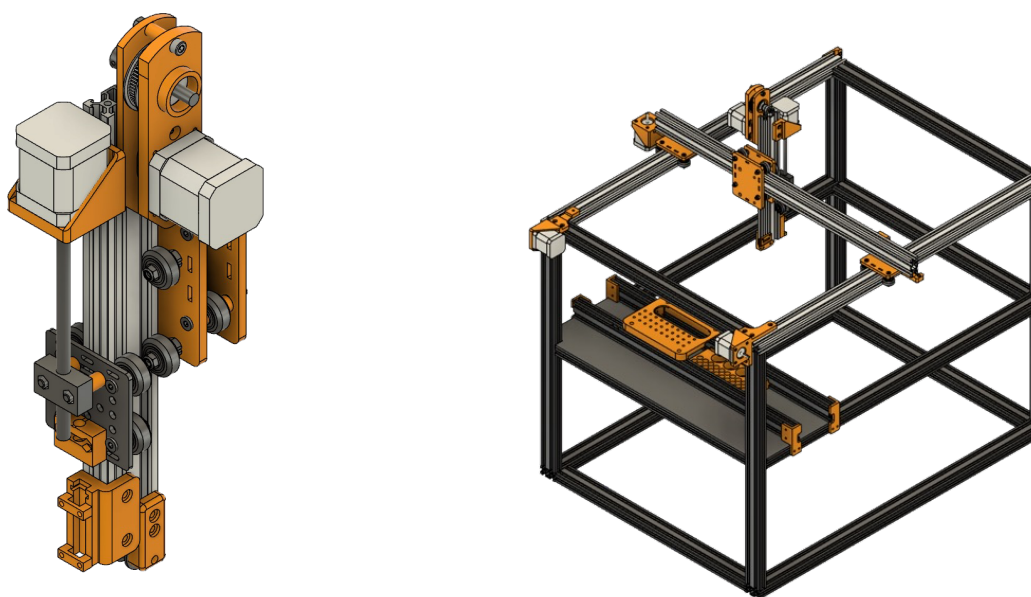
CAD file of the assembled I-, Z-axis, with omitted screws, pulleys, and belts, and the CAD file of MULA with a diagonal view.
